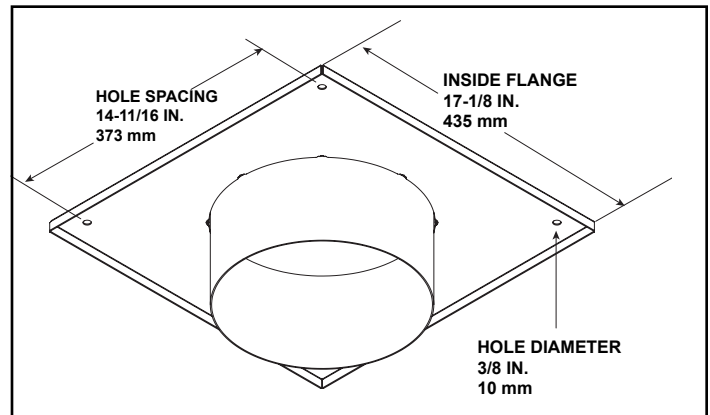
E.2 10 Inch Chimney Collar Dimensions (RS14)
